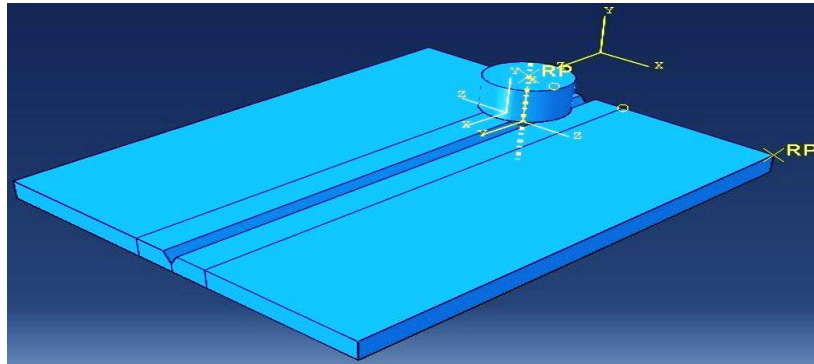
Friction Stir Welding Modeling Assembly (SPH) Method.
